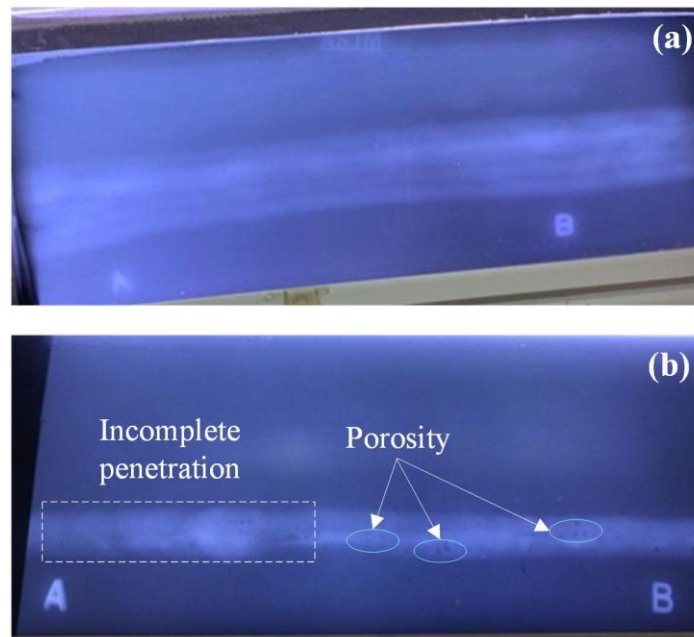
Radiographic test results of welded joints showing internal defects: (a) 3G welding position and (b) 4G welding position.
